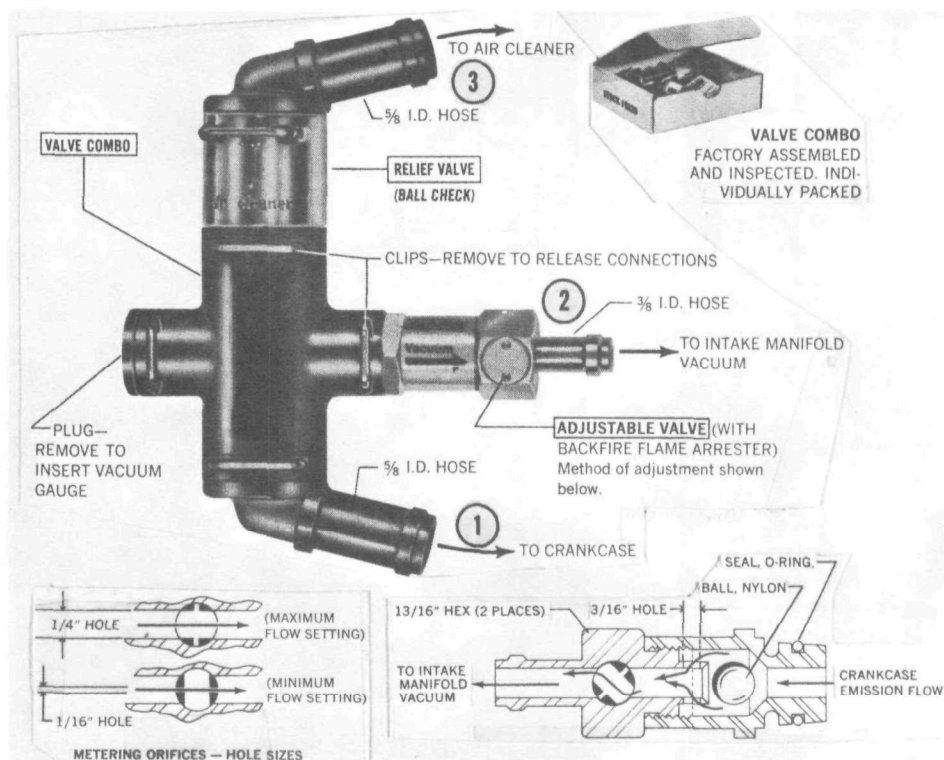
DEVICE 170 CLOSED BLOWBY CONTROL SYSTEM (DEVELOPER DRAWING)
